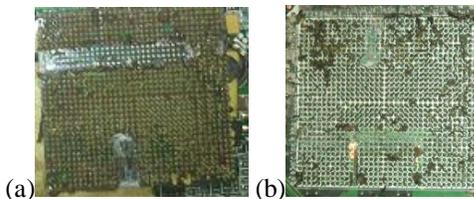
Typical cut from factory produced BGA/Stencil/PCB interconnect showing cross-sections covered with the material formed by casting on the BGA side (a) and on the PCB side (b).
